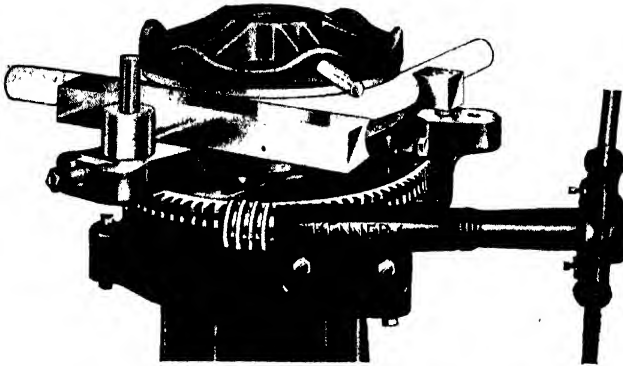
BENDING A 2-IN. LIGHT-GAUGE TUBE WITH A UNIVERSAL BENDER
